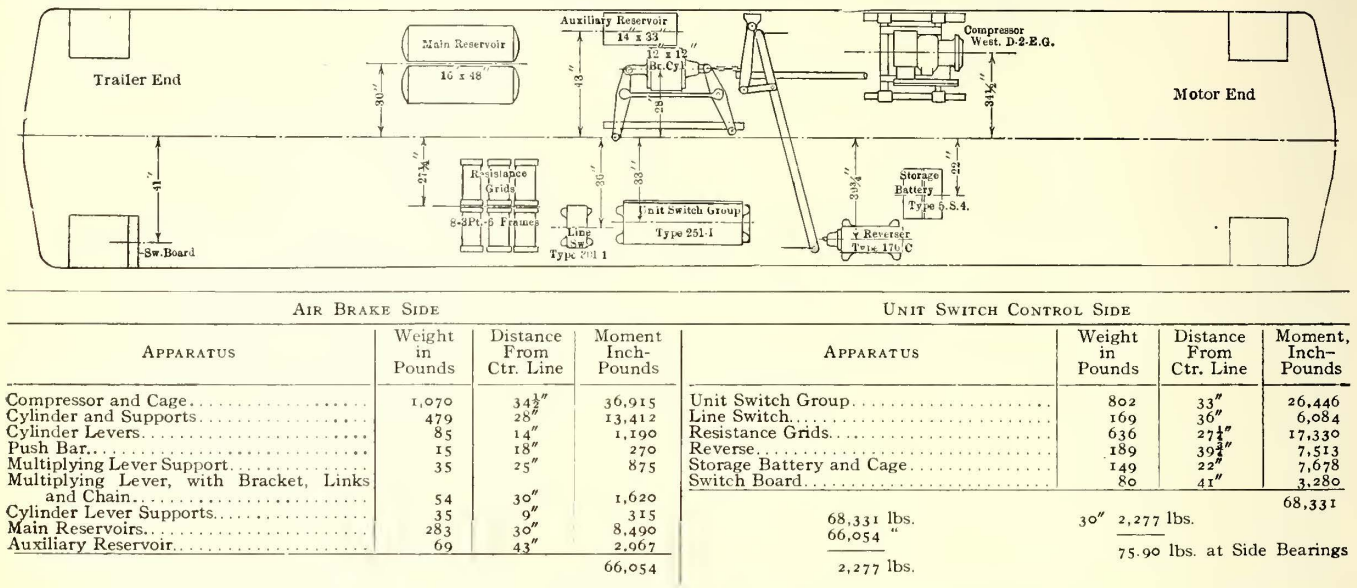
Brooklyn Power Equipment—Balancing of Brake and Control Equipment on Elevated Car
